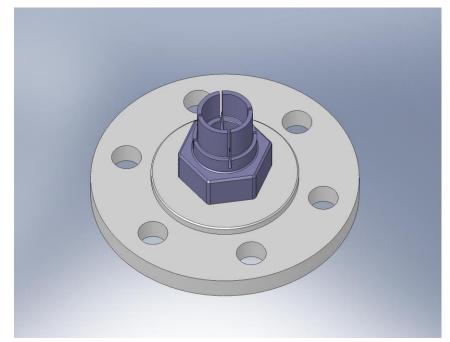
Flexure Mount in Flexure Lower Plate. Relative angle between these parts is not important.
